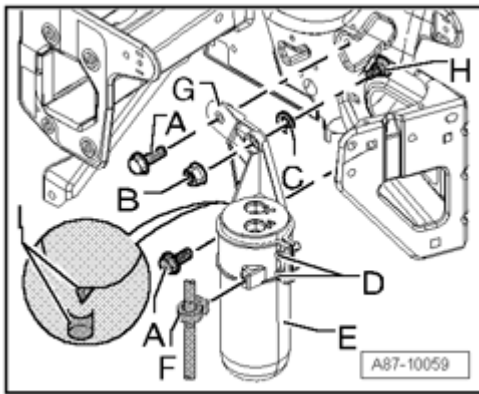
Identifying Bolts, Nuts, Refrigerant Pipe Holder, And Reservoir
